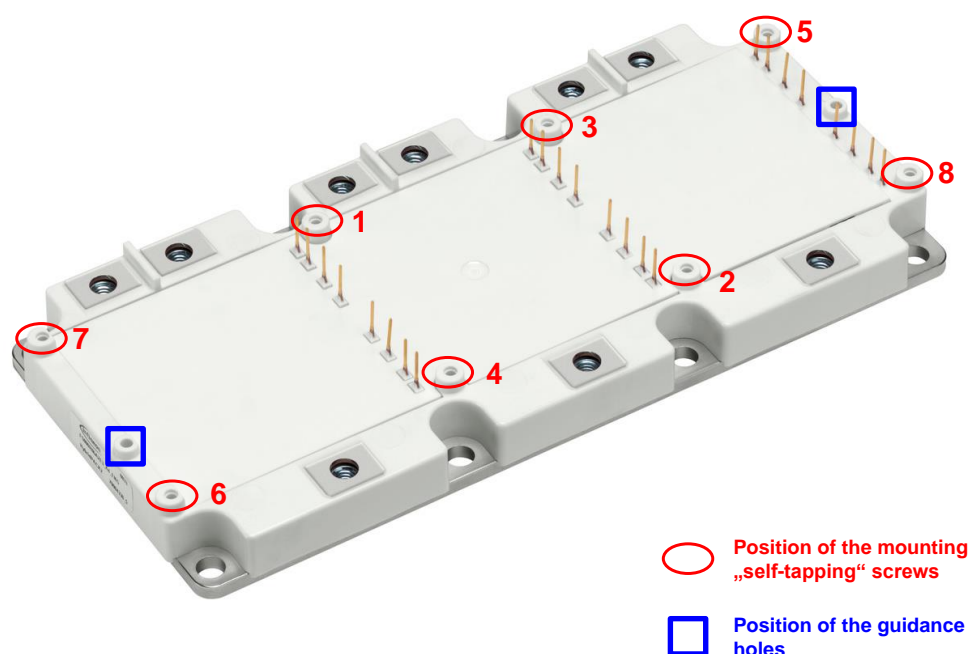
PCB mounting stand-off of HybridPACK™ 2 module.
